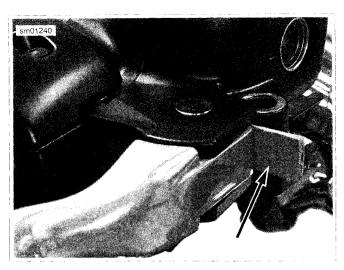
Install Cardboard Insert Before Removing Master Cylinder Assembly
